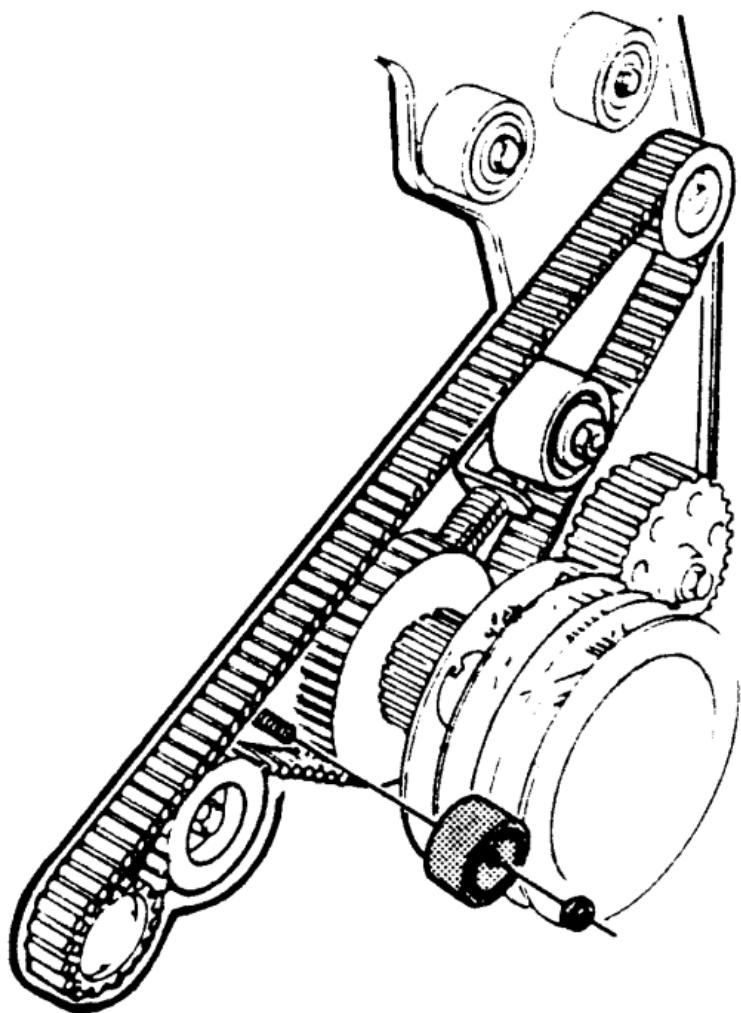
Remove the idler pulley for the balance shaft
